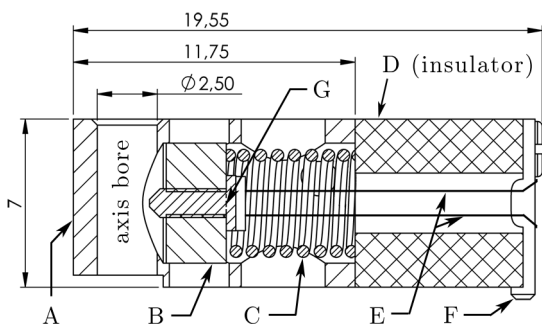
Sectional View of the Prototype, Dimensions in [mm]
